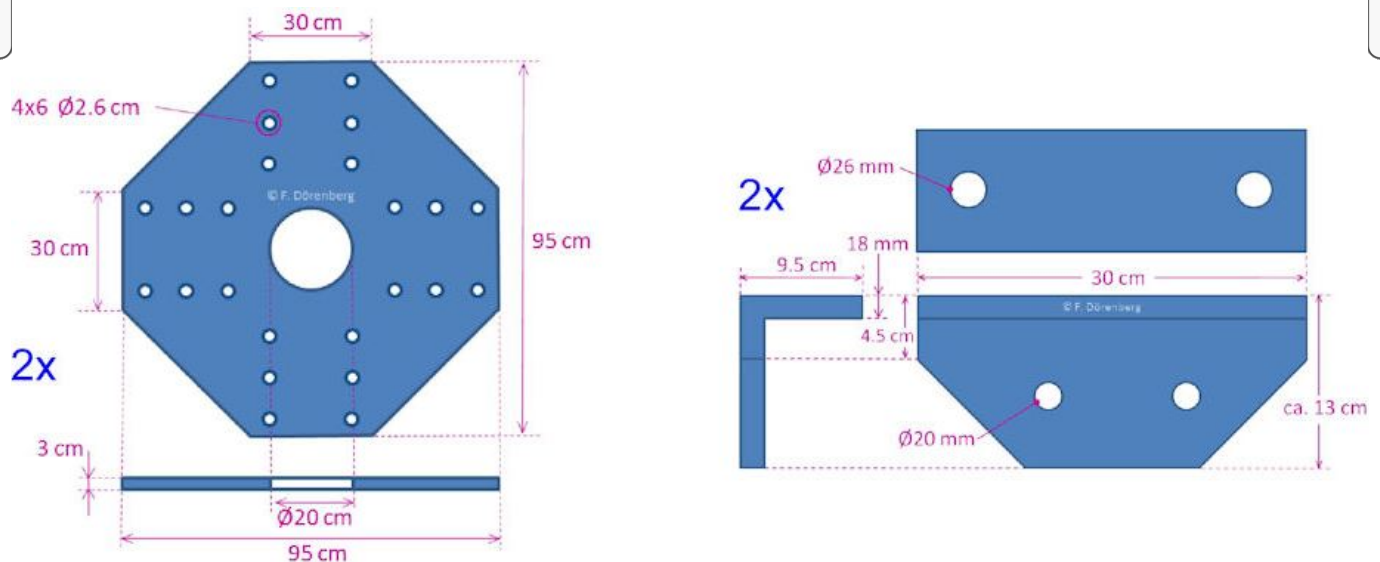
A: Dimensions of the octagonal mounting plates and associated brackets
